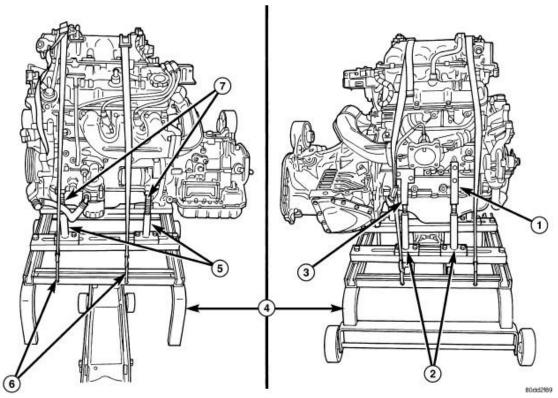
Positioning Engine Cradle Support Post Mounts Courtesy of CHRYSLER LLC
